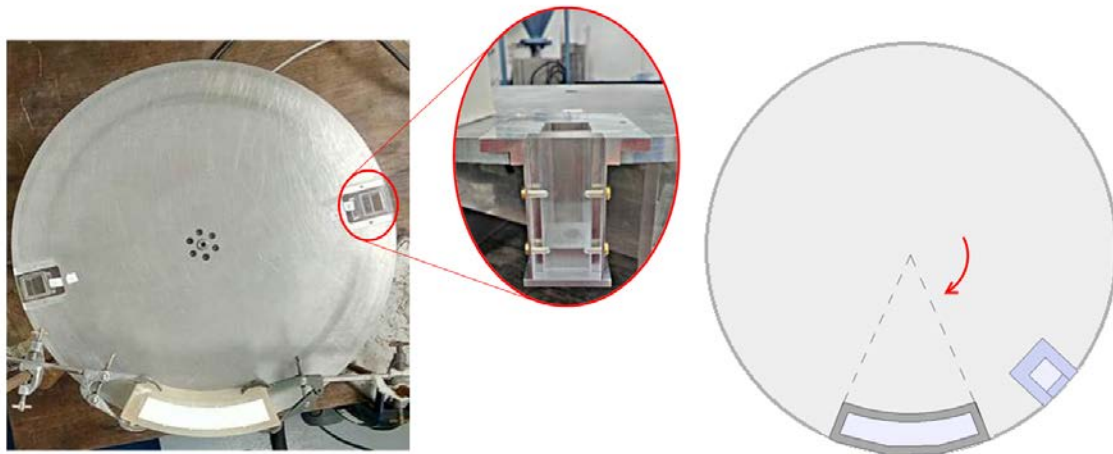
Rotary die filling device, with fixed shoe and rotating plate
